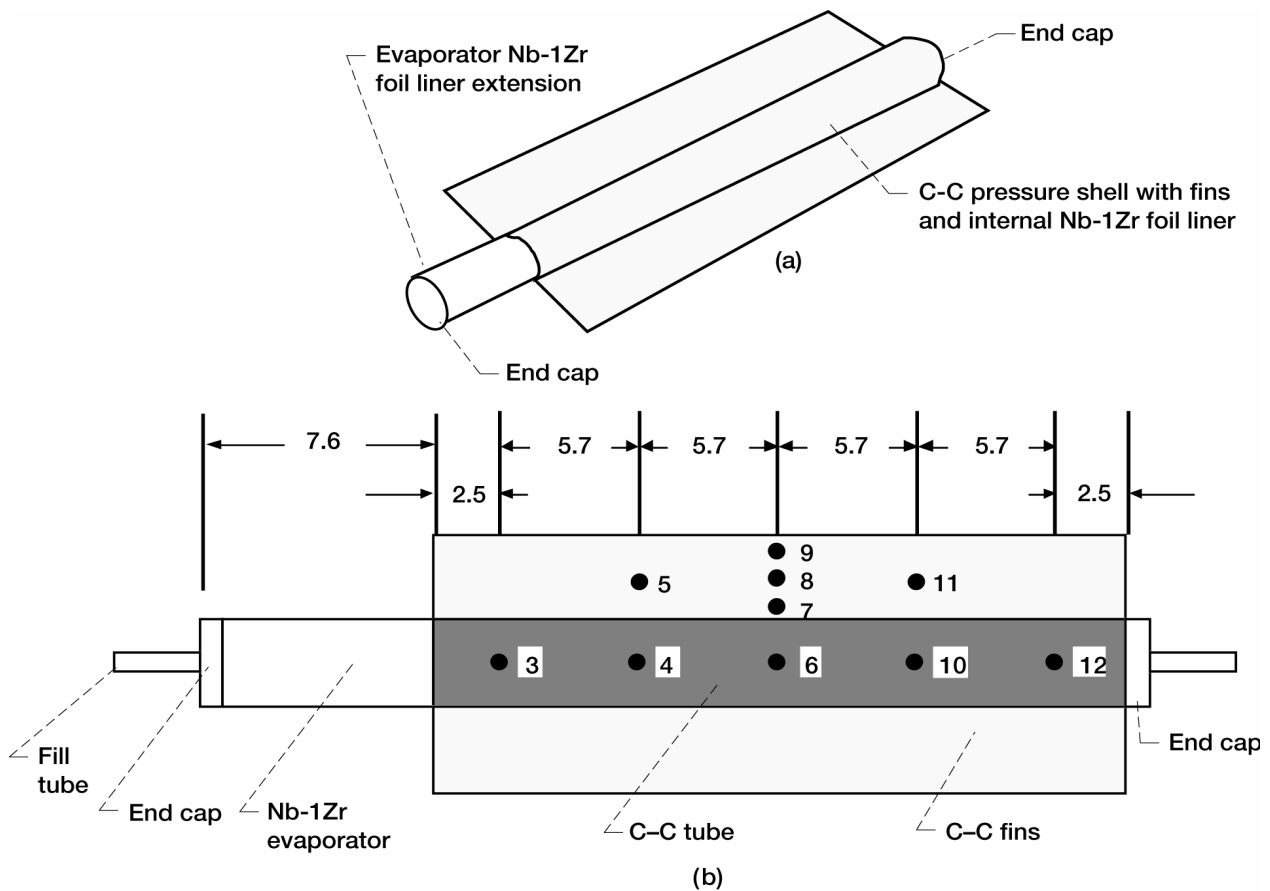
Sketch of 2.5 cm diameter Carbon-Carbon heat pipe radiator element (dimensions in centimeters). (a) C-C shell with integral fins and metallic evaporator liner extension. (b) Top view of test article with thermocouple locations.
